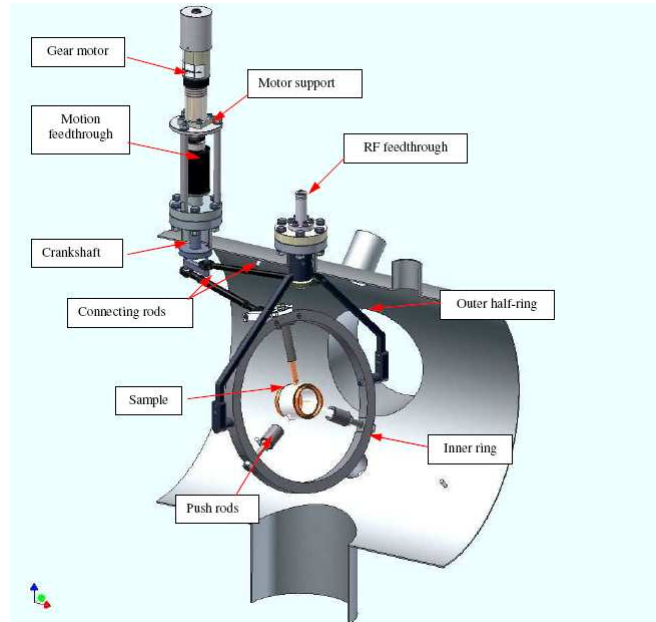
Section view of the vacuum chamber with the sample holder system constituents
